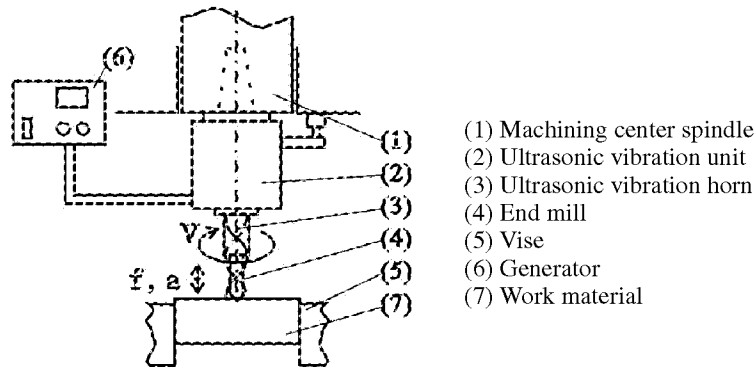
shows a schematic of the ultrasonic end milling apparatus. The u.v. units (2) and (3) were attached to the spindle of the machining center. The end mill was mounted to the horn (3) and used to cut the pre-hardened steel work material. The end mill tools chosen were a DLC-coated WC-Co alloy tool, a CVD diamond-coated one, TiAlN-coated one and sintered diamond tool. Table 1 shows details of the tool, work material and the cutting conditions. As is evident from the Table, the conditions are those for the finishing end milling operation.
